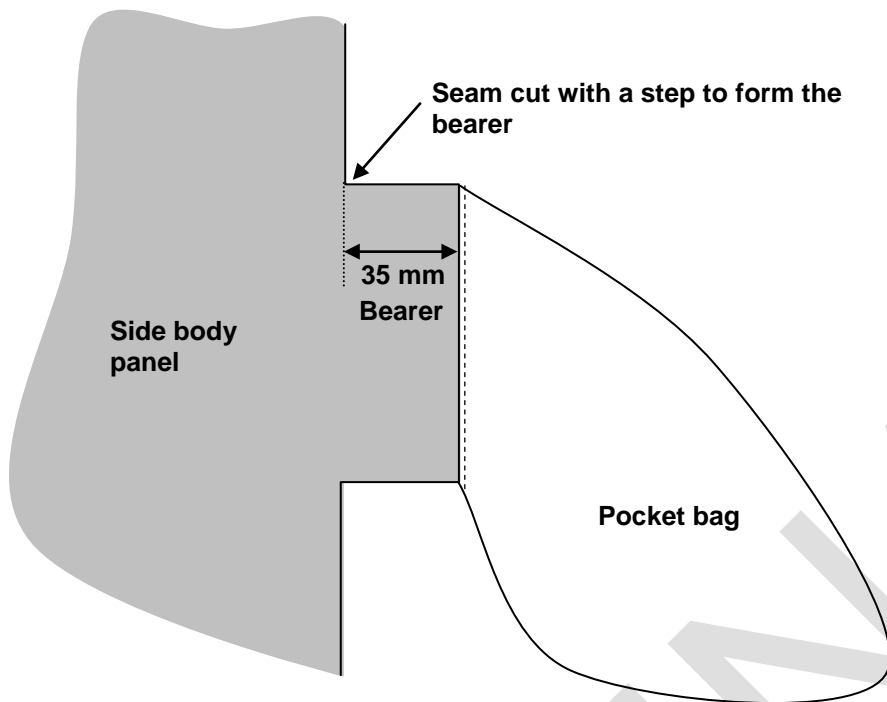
Bearer of inseam pocket (depicting right pocket)
